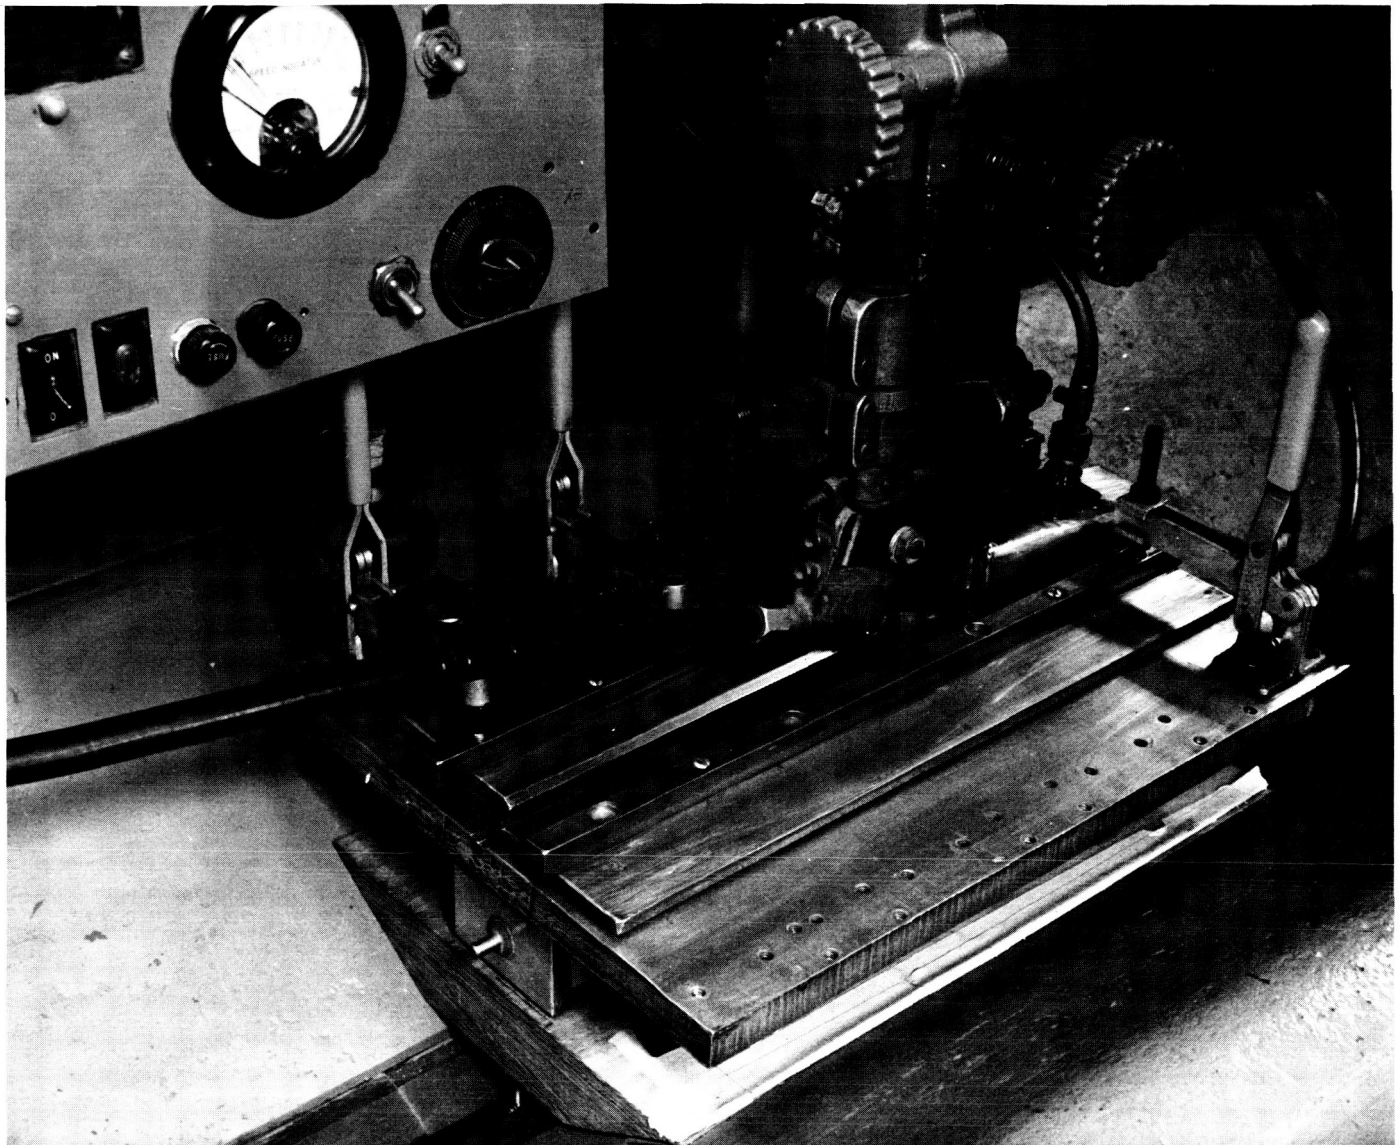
Welding fixture for 0.40-in.-thick titanium alloy sheet (Some of the hold-down clamps have been removed for clarity.)
